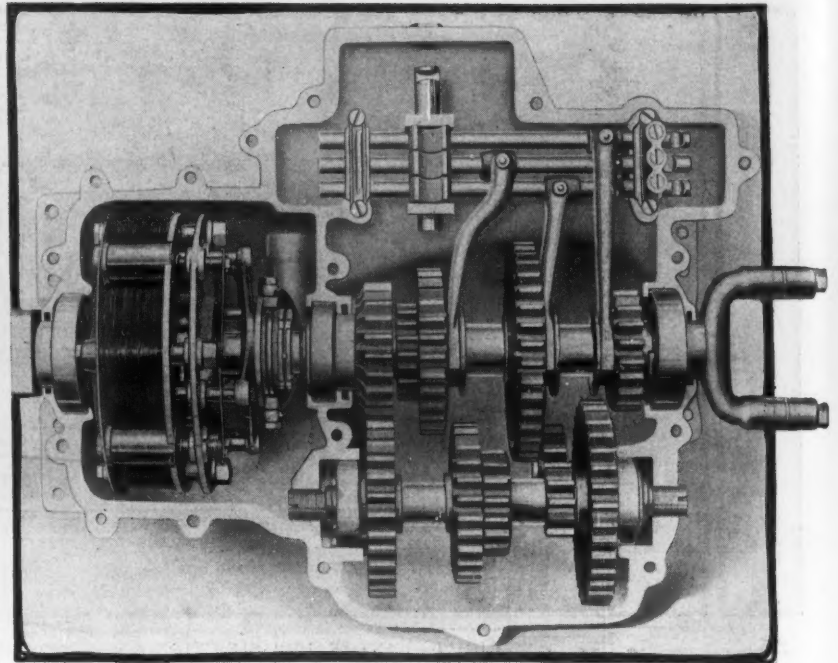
FOUR-SPEED GEARSET OF WINTON
